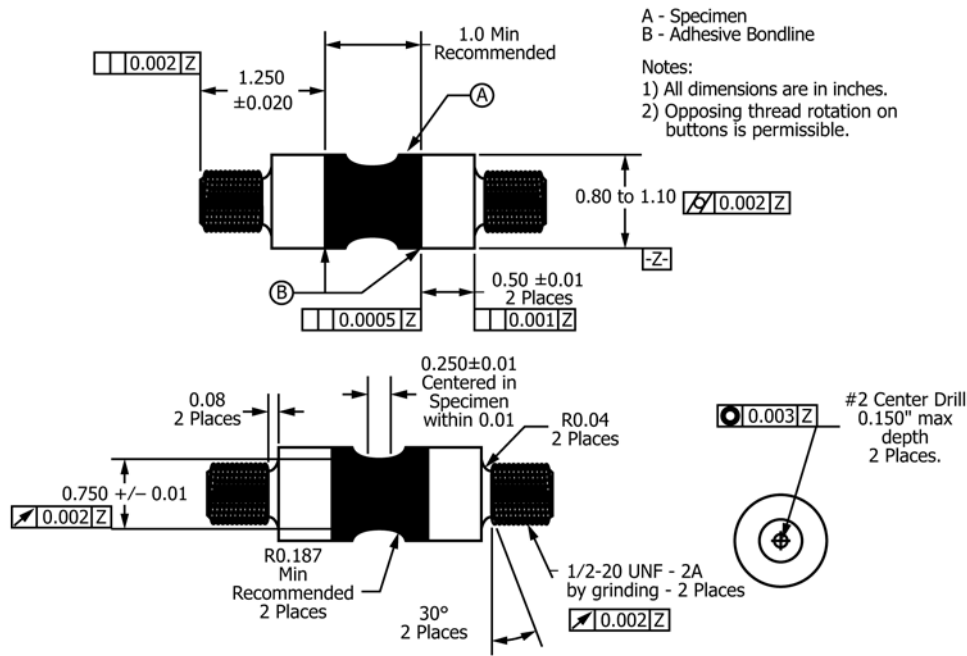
Drawing of End Tabs and “Spool” Specimen Assembly (inch-pound units)
